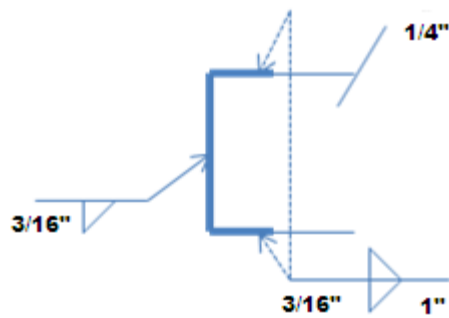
Double Angle Connection Weld Length, Size and Position
